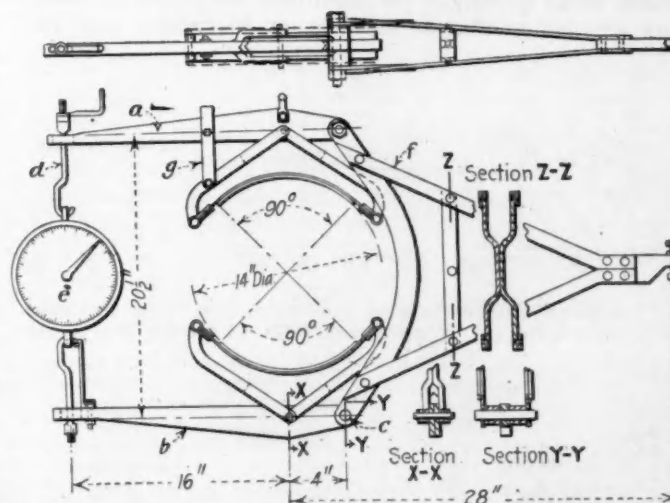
ASSEMBLY DRAWING OF BRAKE-LINING TEST MECHANISM
